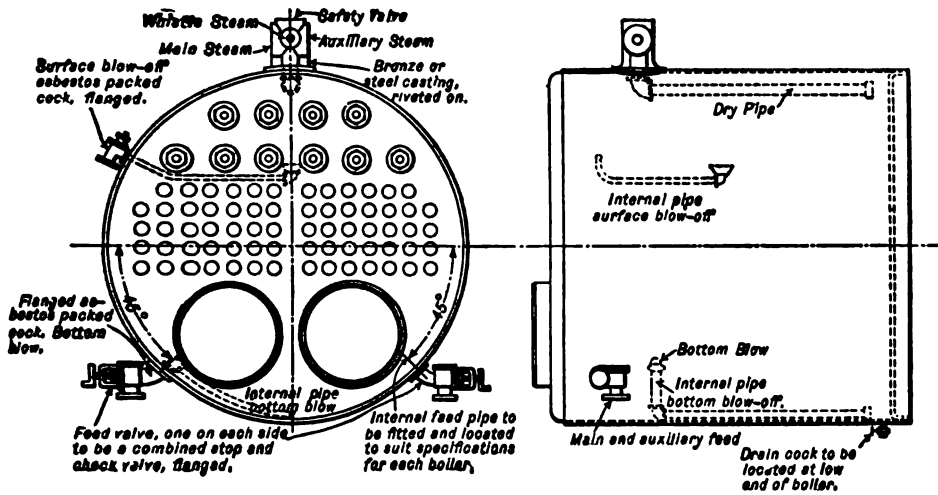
CONNECTIONS FOR INTERNAL FURNACE BOILERS.
